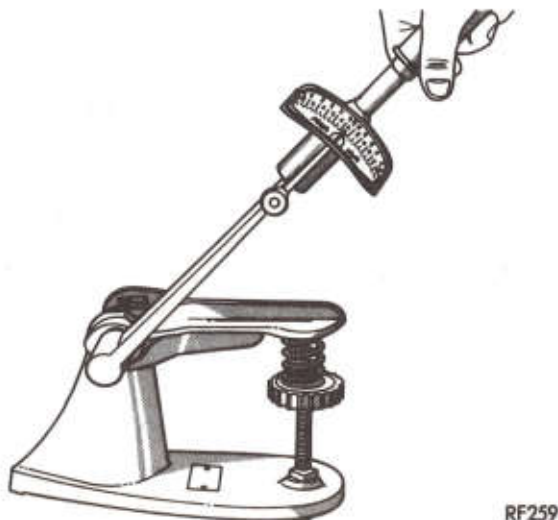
Testing Valve Spring for Compressed Length with Tool C-647
